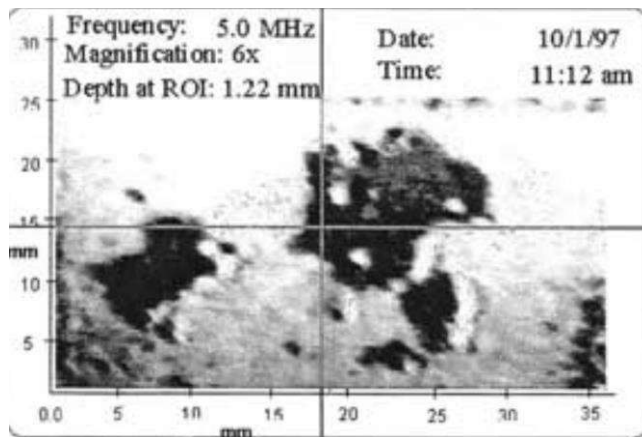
Ultrasonic reading from corroded aluminium plate [12]
